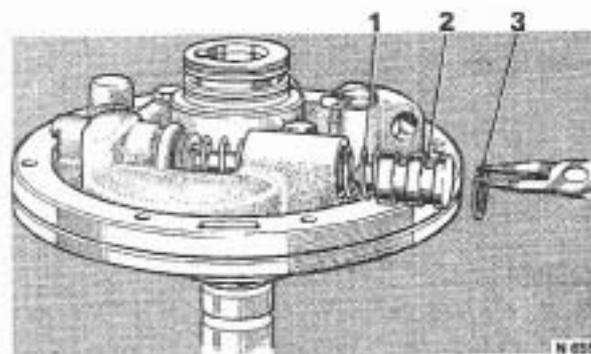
REMOVING THE REGULATOR VALVE RETAINING CIRCLIP
